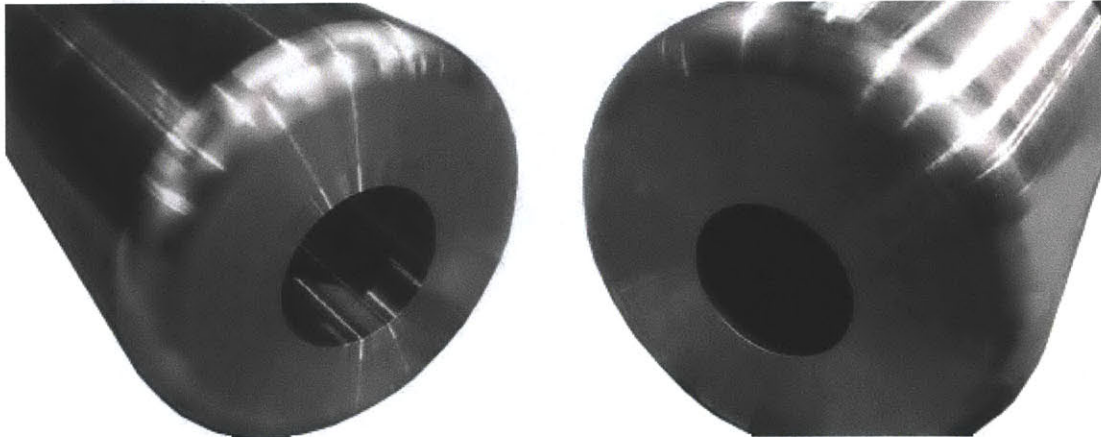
Finished ID-clad weld overlaid billet
